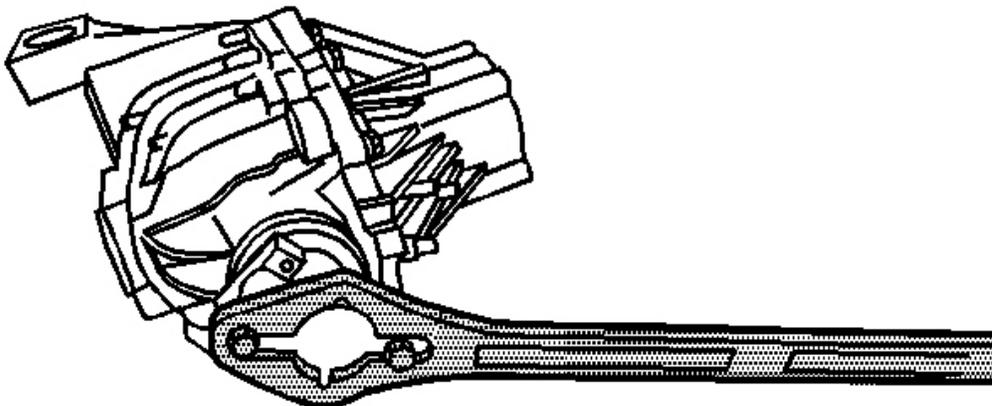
Installing J 8614-01 Onto Pinion Yoke
